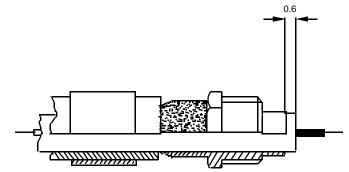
Frame Grounding and Assembly for PCM-30 Line Drawer Cable
